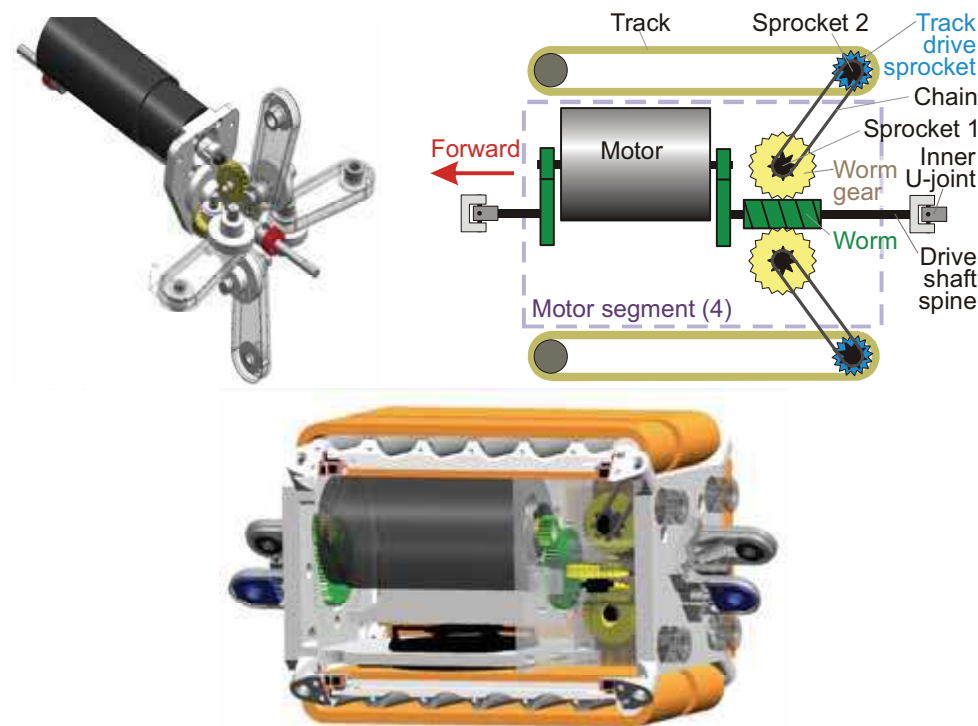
CAD drawings of the OmniTread gearboxes: a – OT-8 gearbox, shown here for the motor segment. b – Schematic of the OT-4 drive system, shown here for the motor segment. c – CAD drawing of the OT-4 motor segment.
